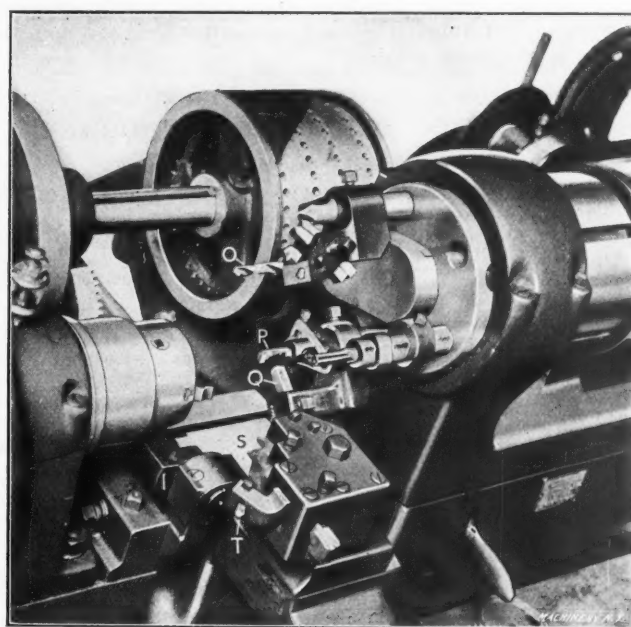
Another View of Tool Equipment for Machining Handwheel
